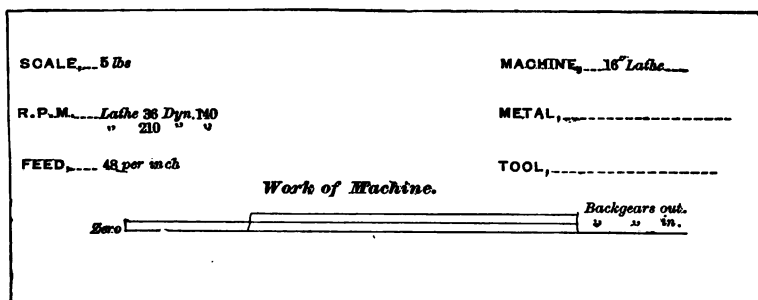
FRICTION-CARD FOR 16-INCH LATHE.
